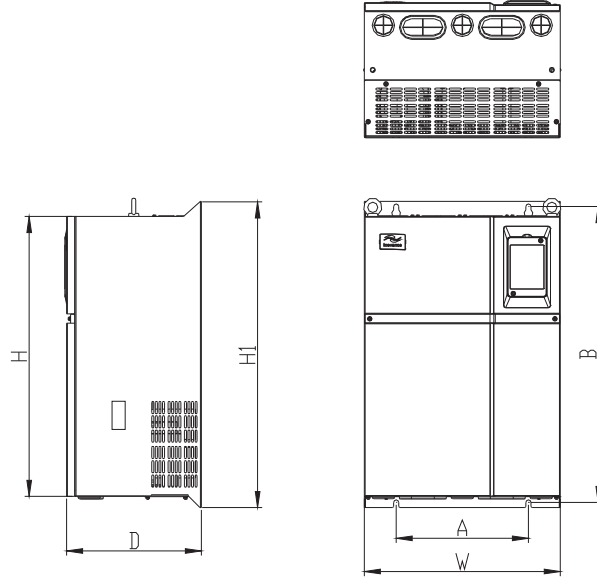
Schematic Diagram for Physical Dimensions and Mounting Dimensions of MD280NT18.5G/22P to MD280NT400G/450P
